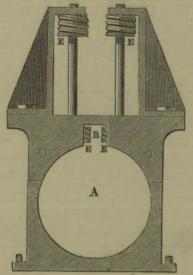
SECTION OF TUBE, CHAMBER, BOX, AND SPINDLES.
